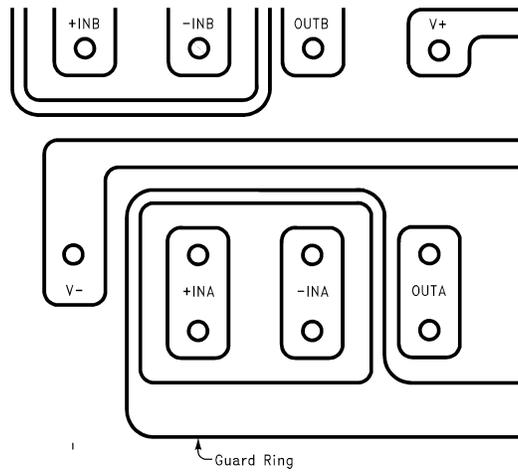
Layout Example: Using the LMC6035-Q1 Guard Ring in PCB Layout
